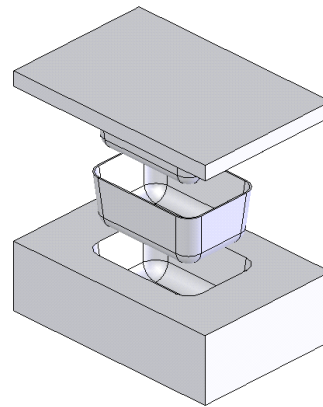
Exploded view of the core and cavity assembly with the resultant component.
